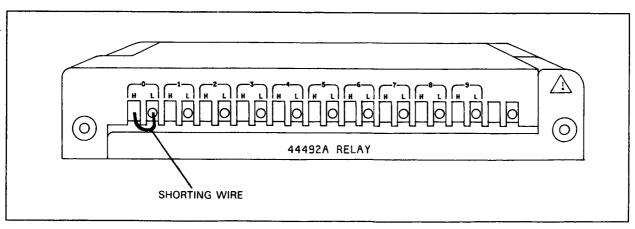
HP 44492A Terminal Block Assembly Connections
